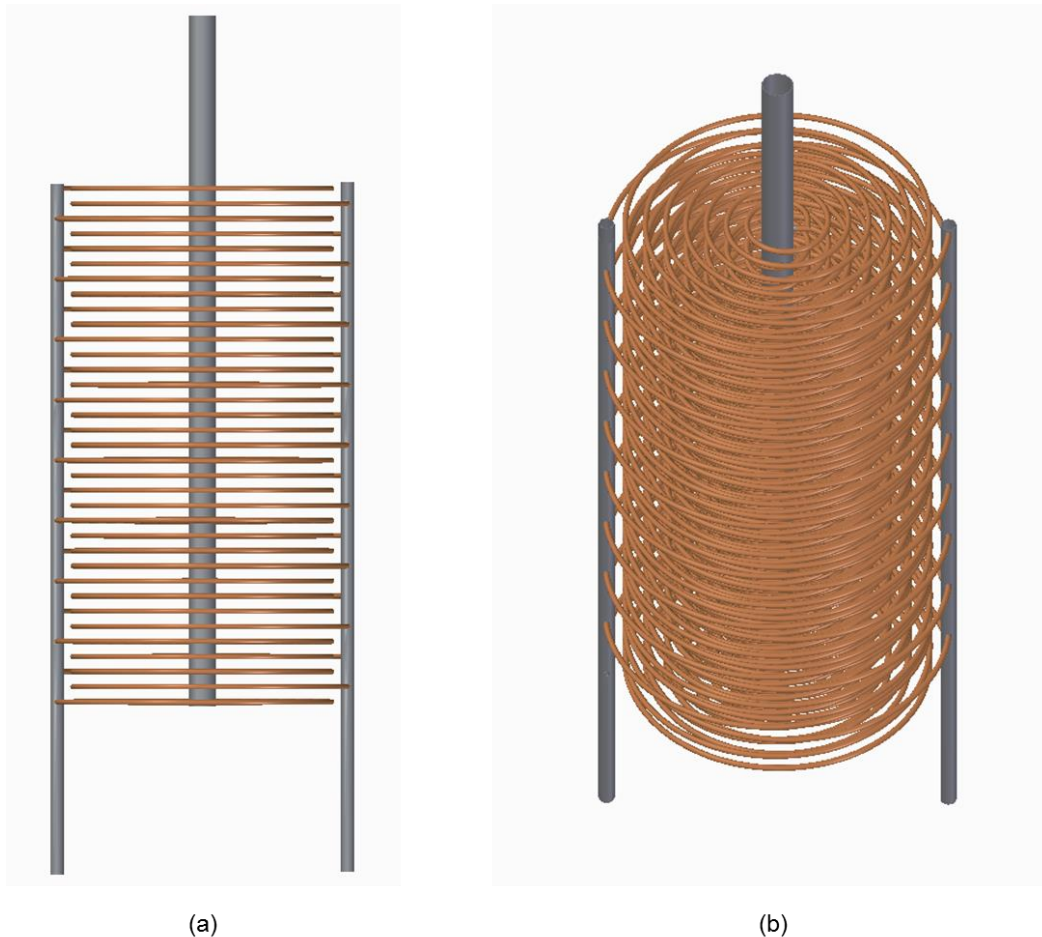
Final CAD model; (a) Side View, (b) Isometric view
